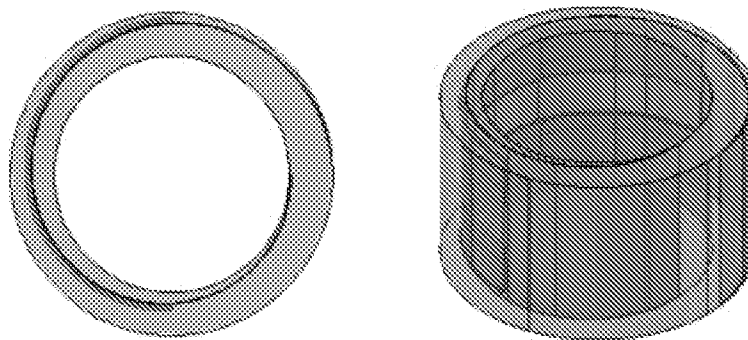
Cross-sectional and isometric views of the self-enveloping design.
